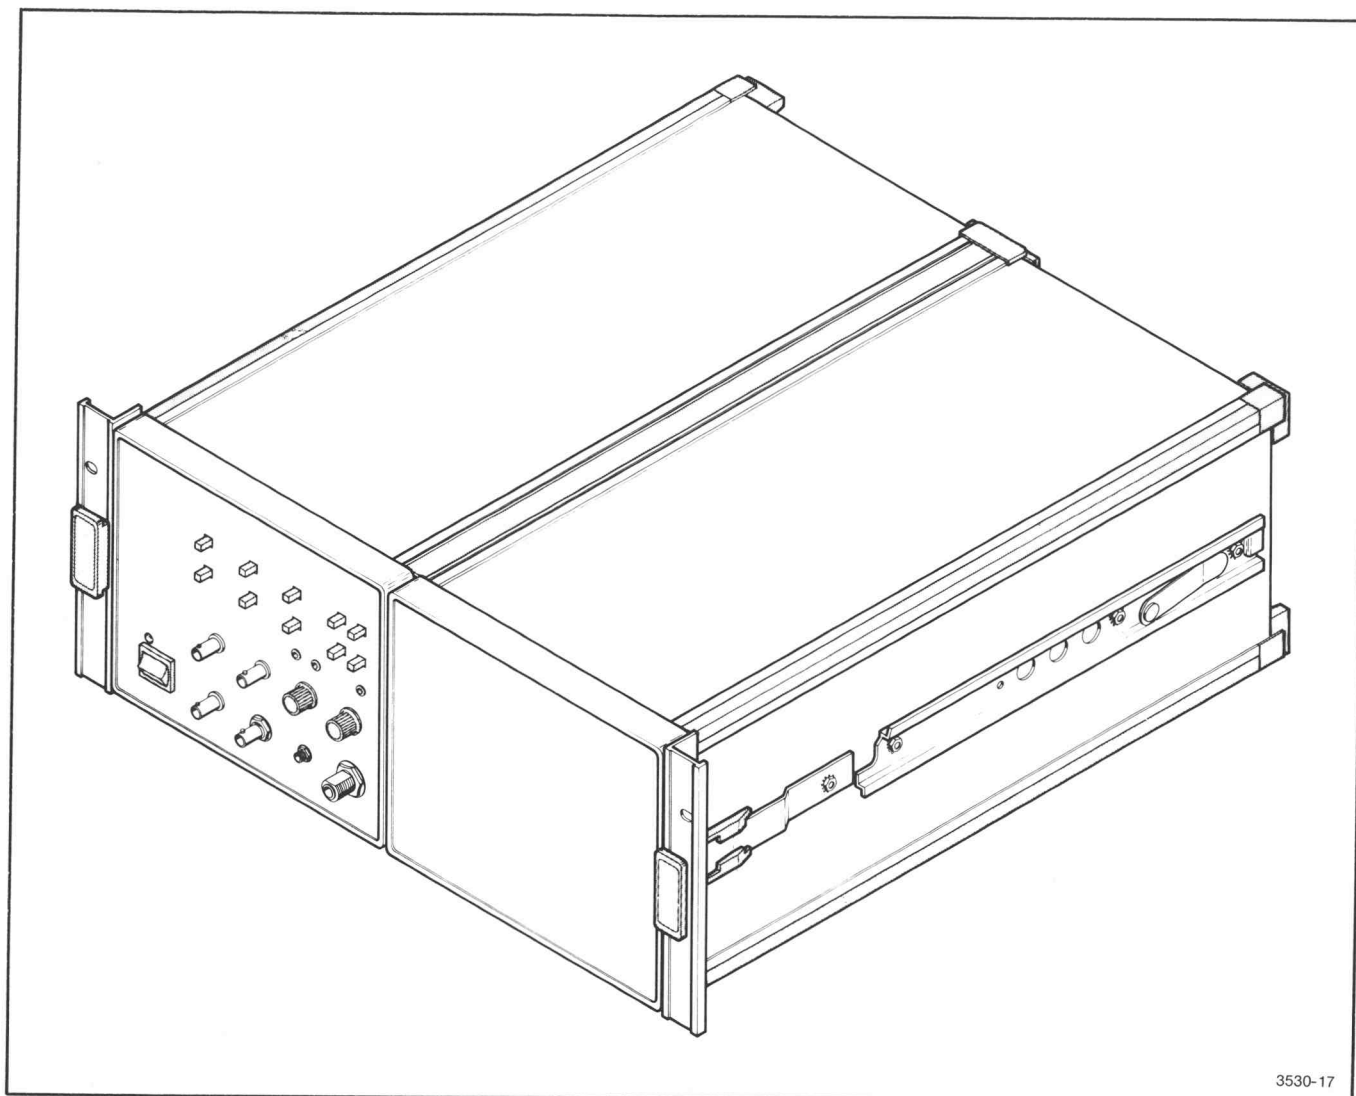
Two Test Modulators Assembled For Rackmounting.
